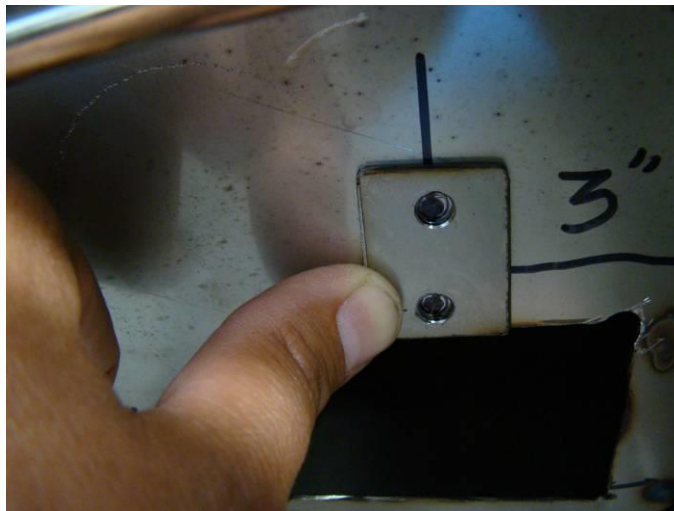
Marking the bulkhead for drilling. The corner pickup mount is centered fore-aft on the 3" edge.
